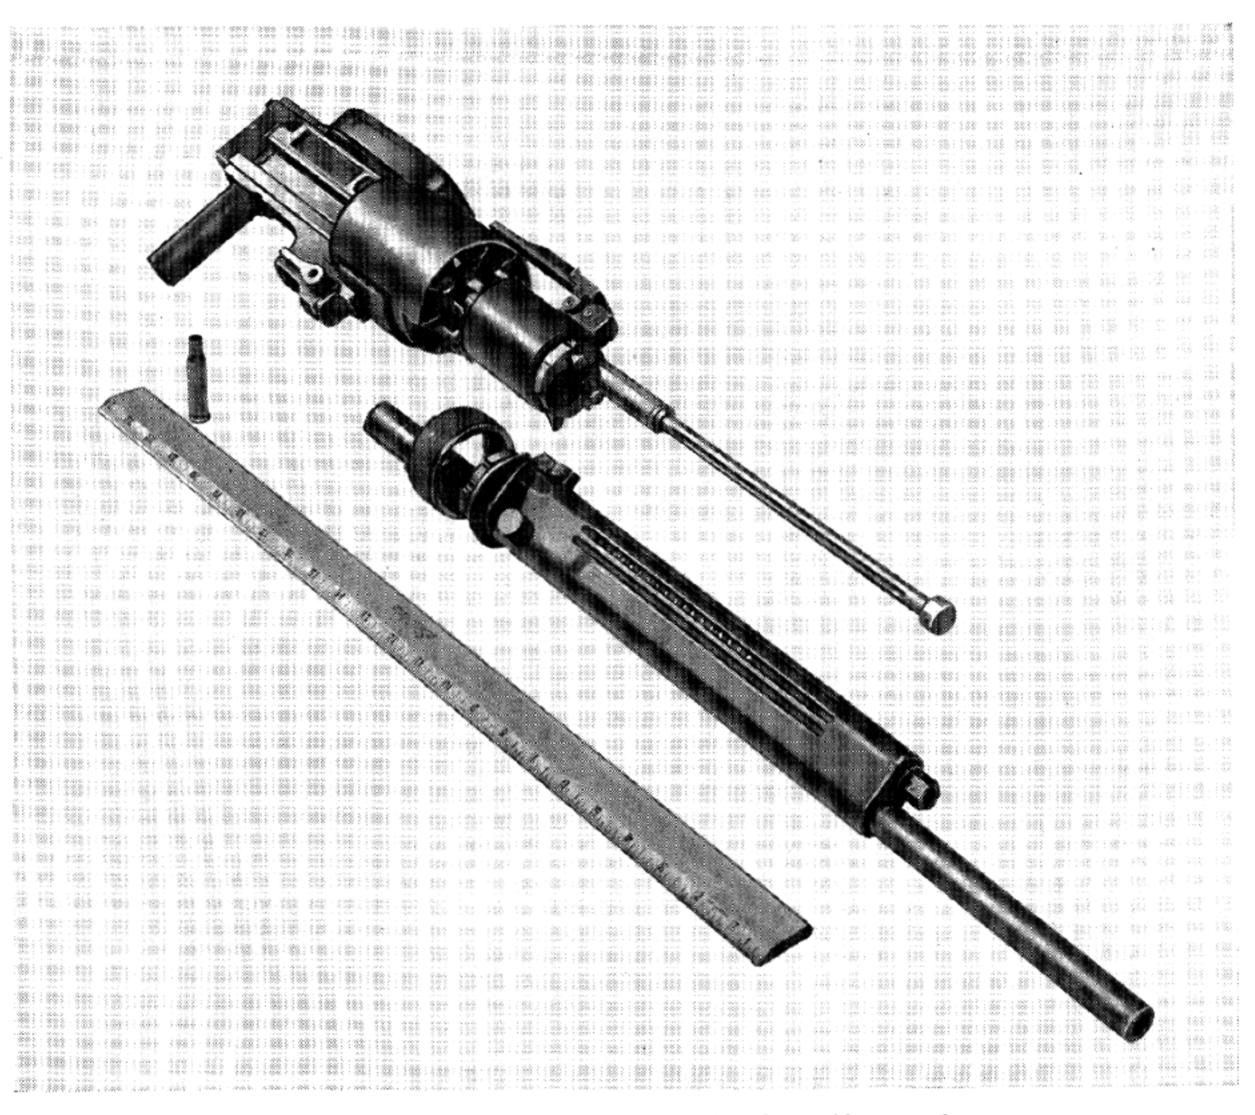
7.62-mm Shkas Fixed Gun, with barrel assembly removed.
